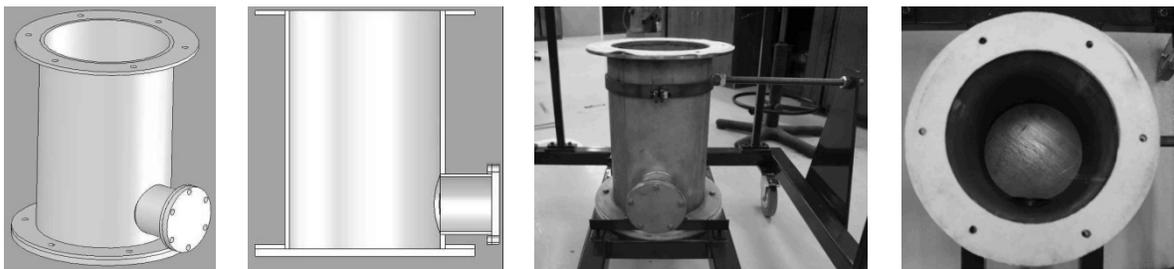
Schematic, cross sectional & manufactured view of bottom part
